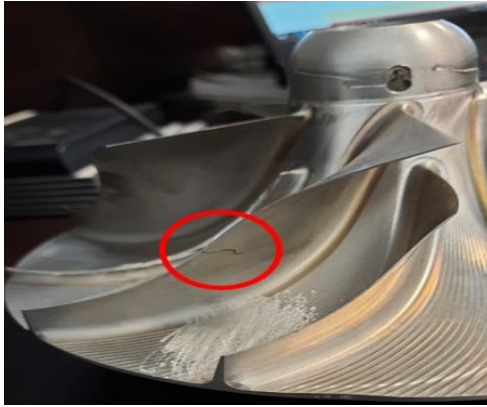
Fracture on impeller blade (HAUS Turbo blower impeller).
